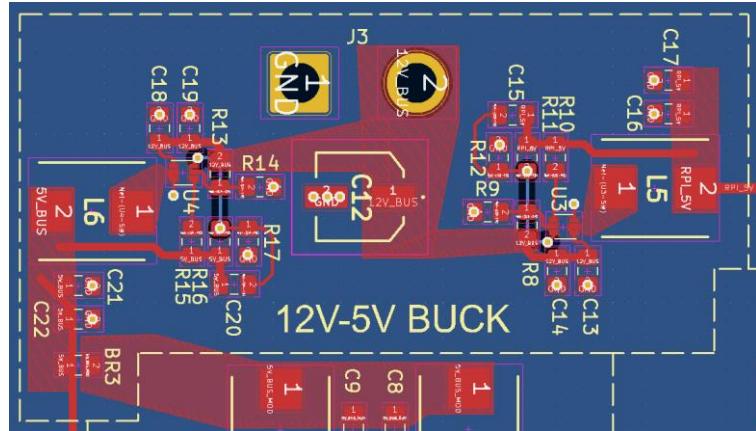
Input & 12V to 5V buck converter subsystem PCB layout and routing
